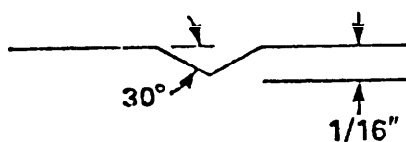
Test specimen for adhesion testing class II cylindrical bearing.
